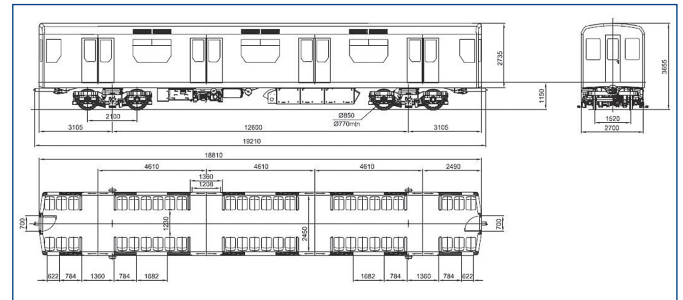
Layout drawing of underground railway car for Saint Petersburg
